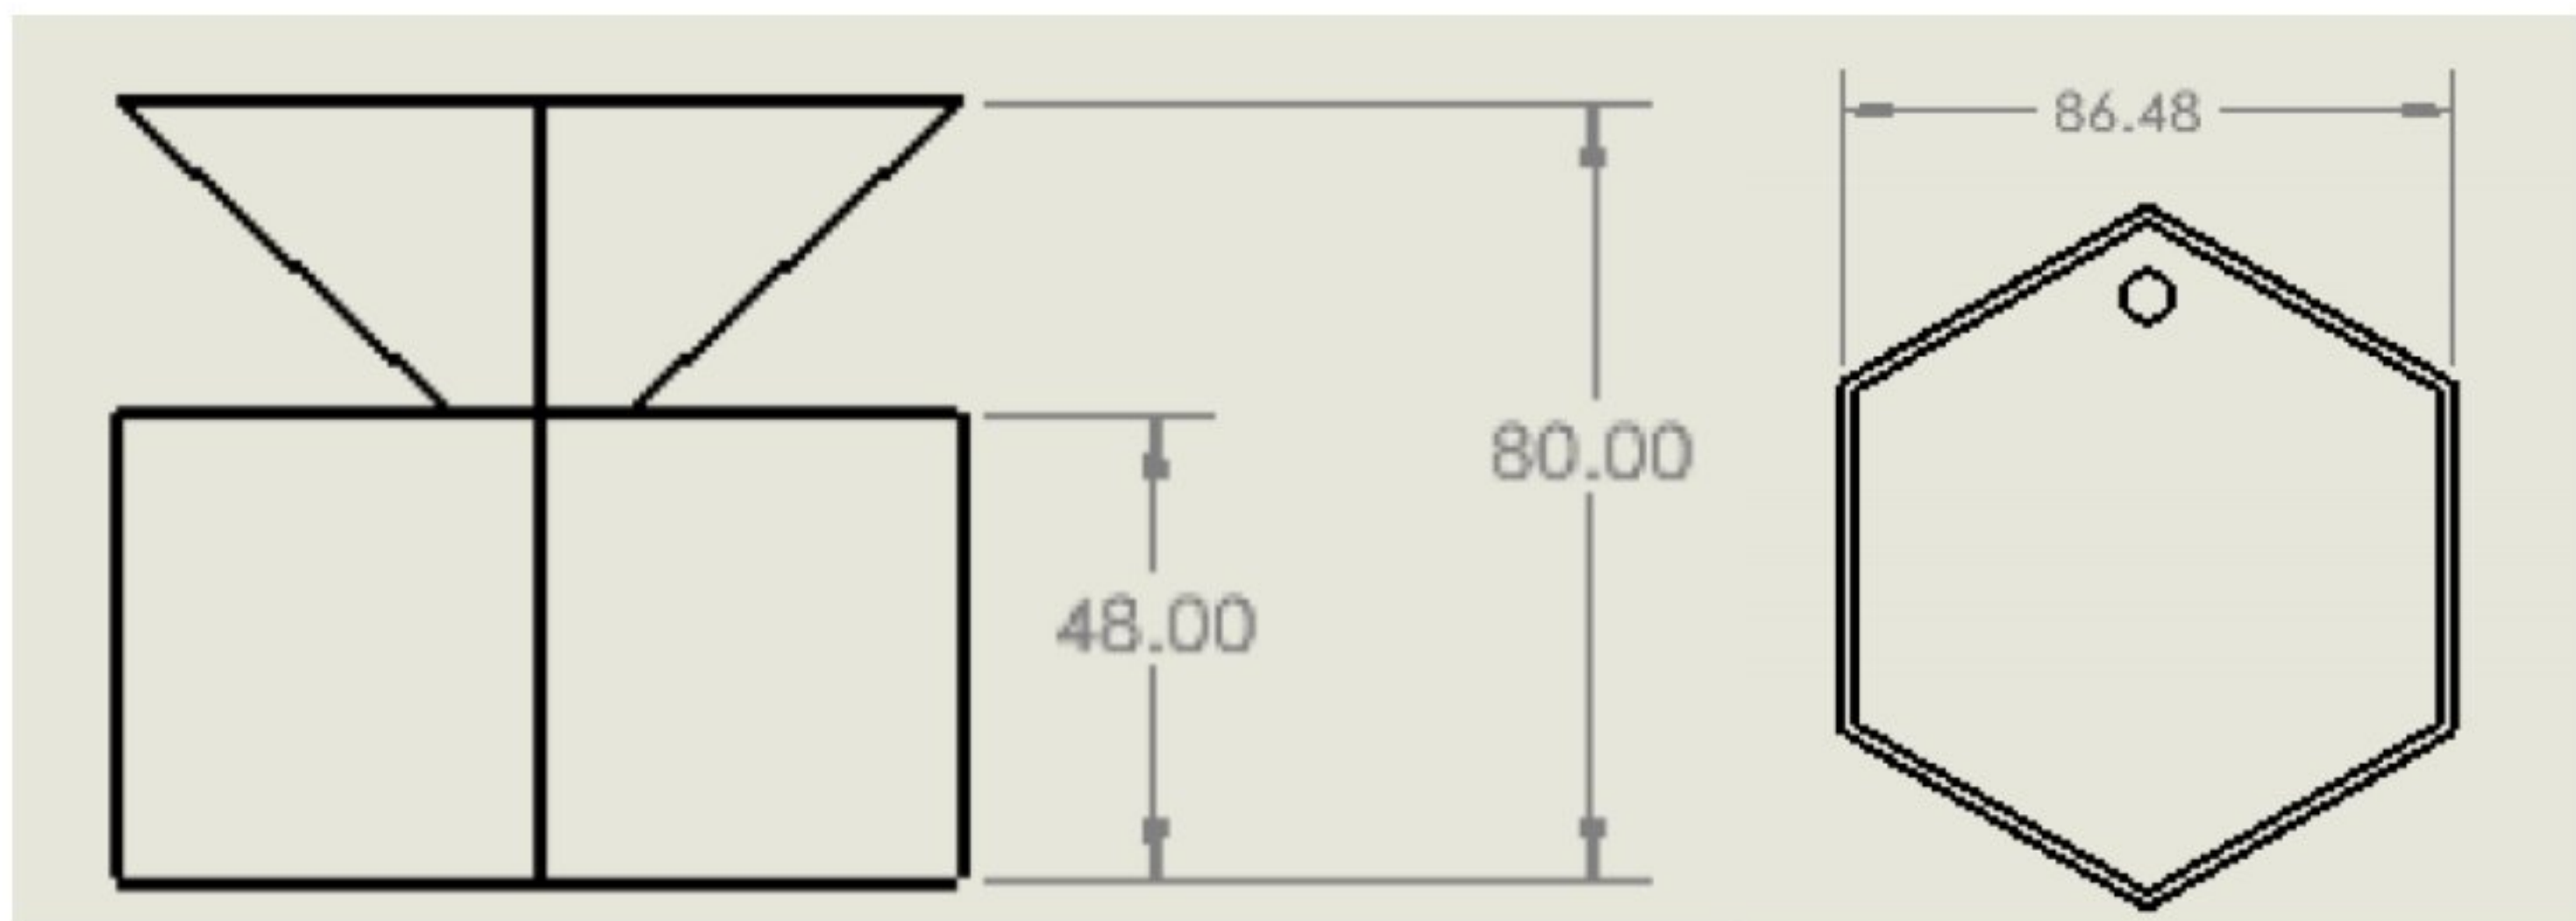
Front and Bottom view of the prototype along with dimensions. [1].
